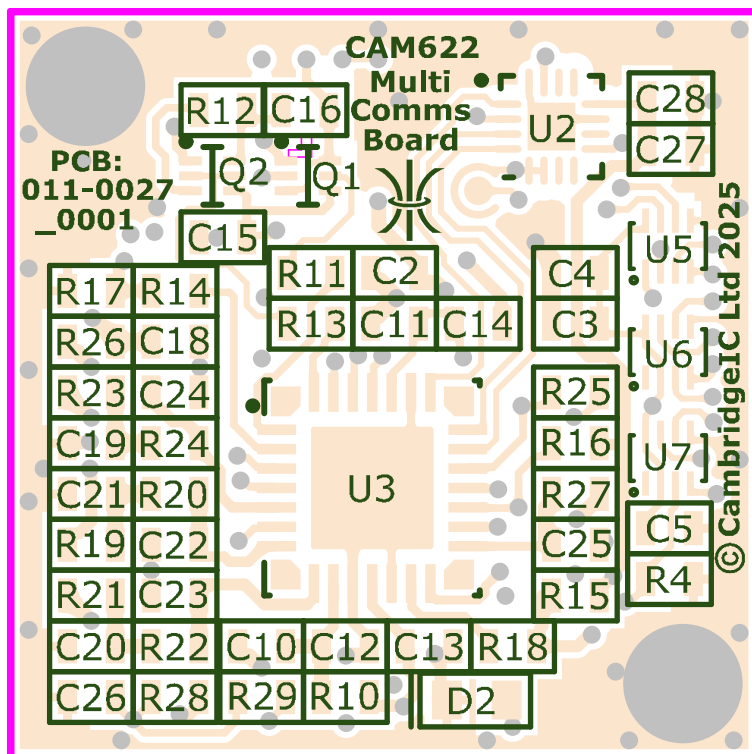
CAM622 Multi Comms Board Component Placement, Top
